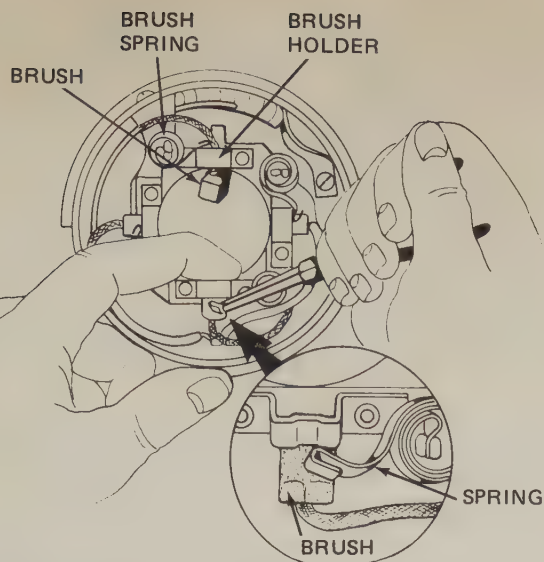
Checking the brushes for wear. (Briggs & Stratton Corporation)
